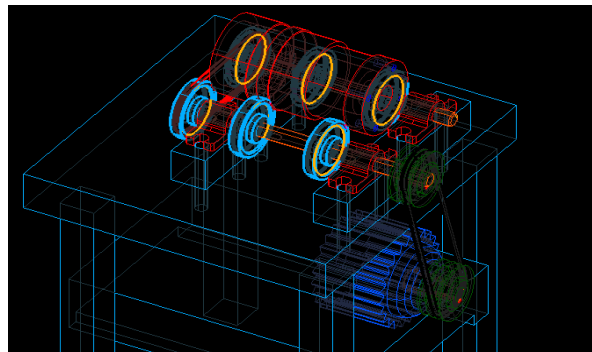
Pro-E 3D Model of Centrifugal Casting Machine
